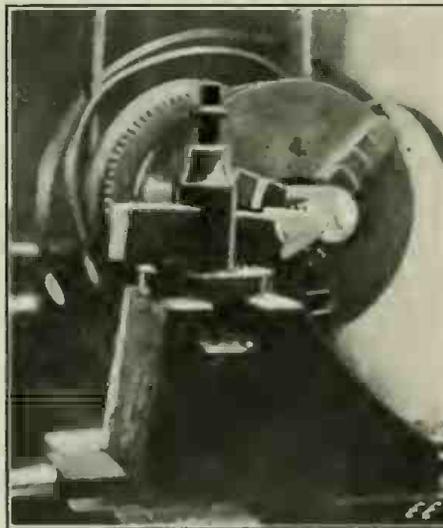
"Facing Up" the End of a piece of Steel Shaft Held in a Universal Three-Jaw Chuck on the Lathe.
